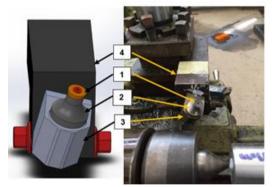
Assembly of the SPRT tool (1. Insert, 2. Shaft, 3. Shaft holder, 4.Shank)
